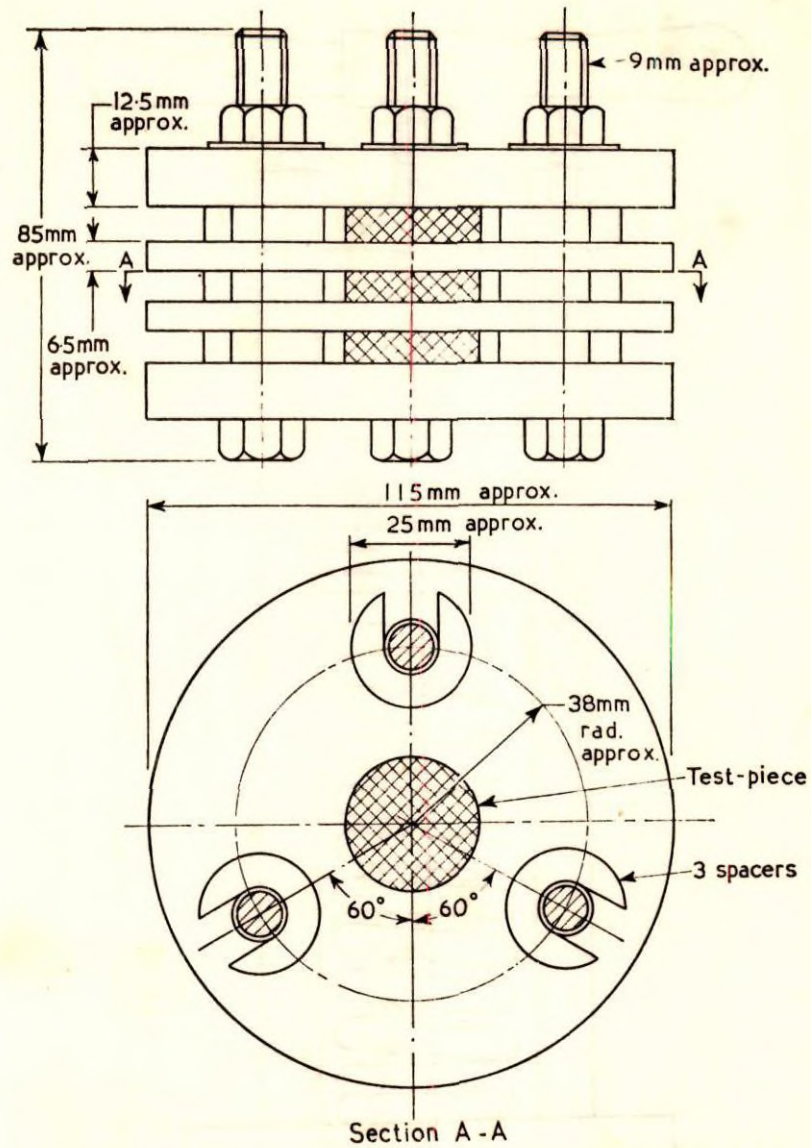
Apparatus for compression set, Method A, using Type 2 test piece
